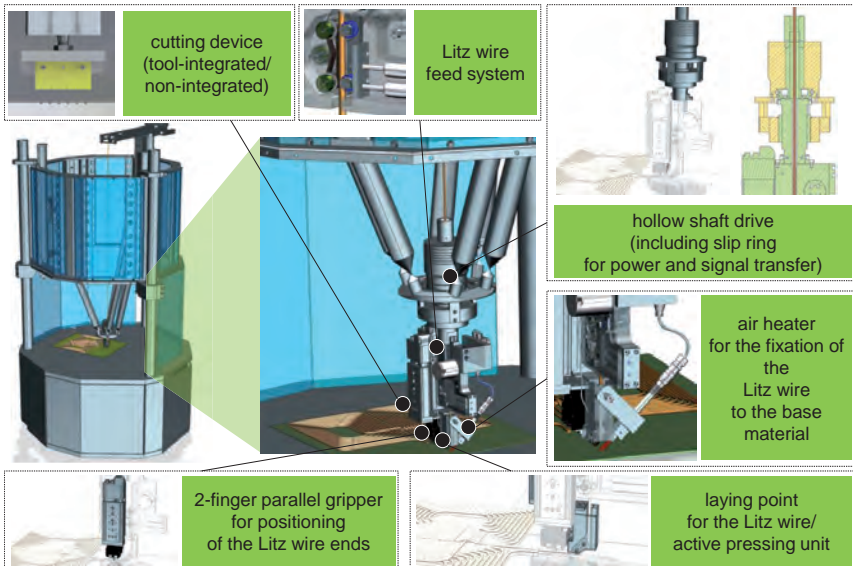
Delta kinematic arrangement and laying tool with wire feed through robot flange.
